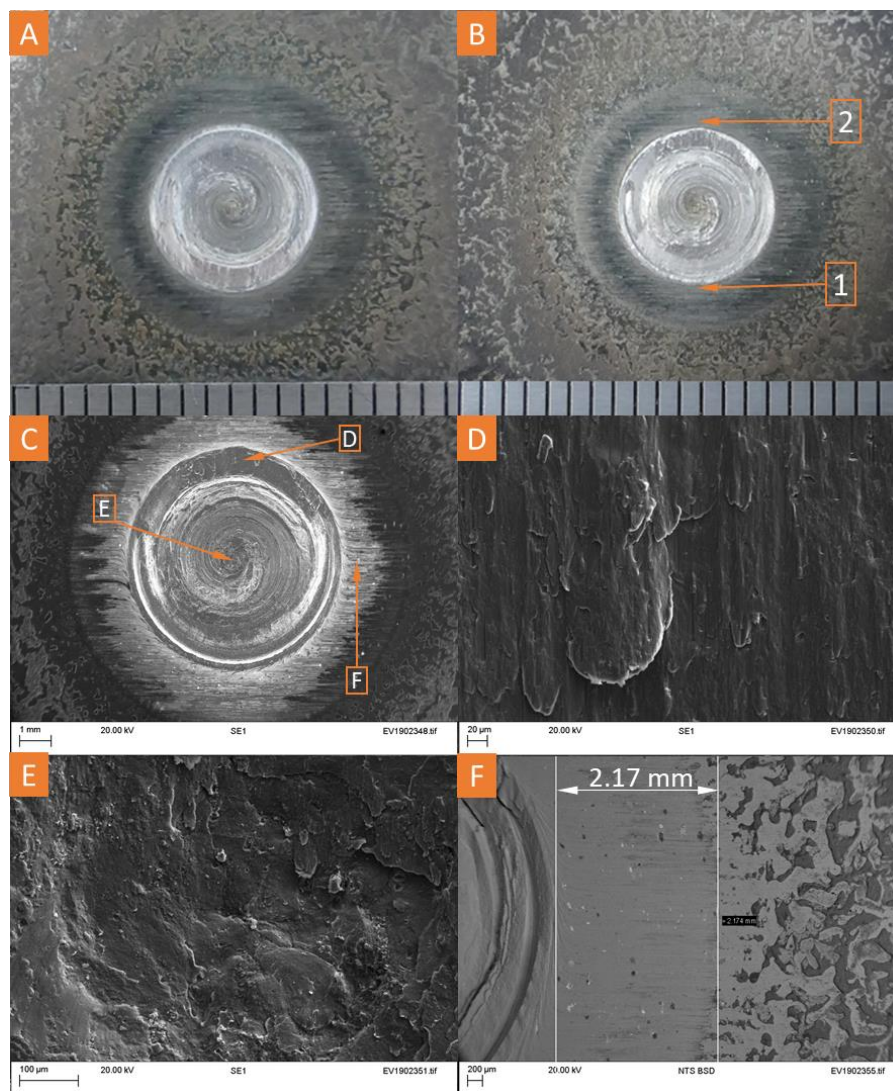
Fracture surfaces of RFSSW AA2024-T3 weld condition W3 with sealant (RS = 1000 rev/min; PD = 2.4 mm):
